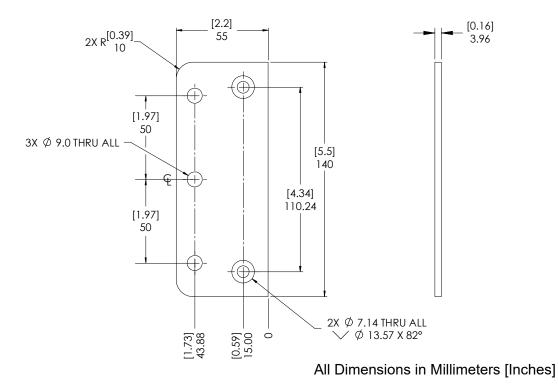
NC-12 Mounting Plate Mechanical Drawing
